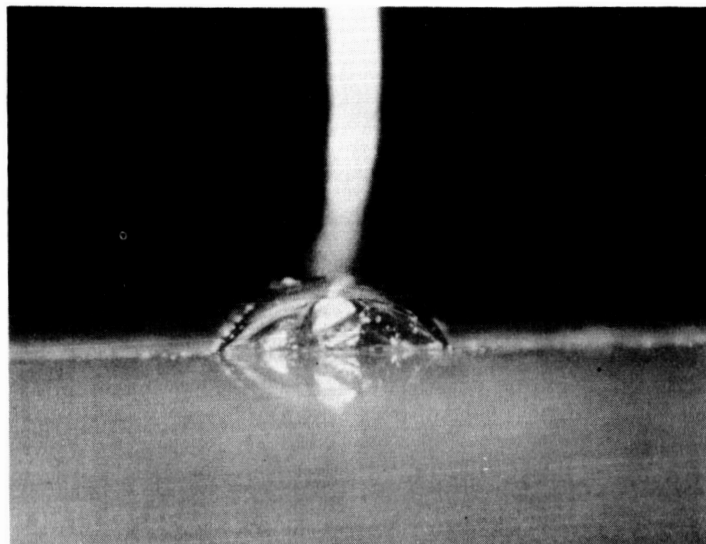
Figure IV — Solder joint on gold plated board using 17.5 percent indium solder (10X).
